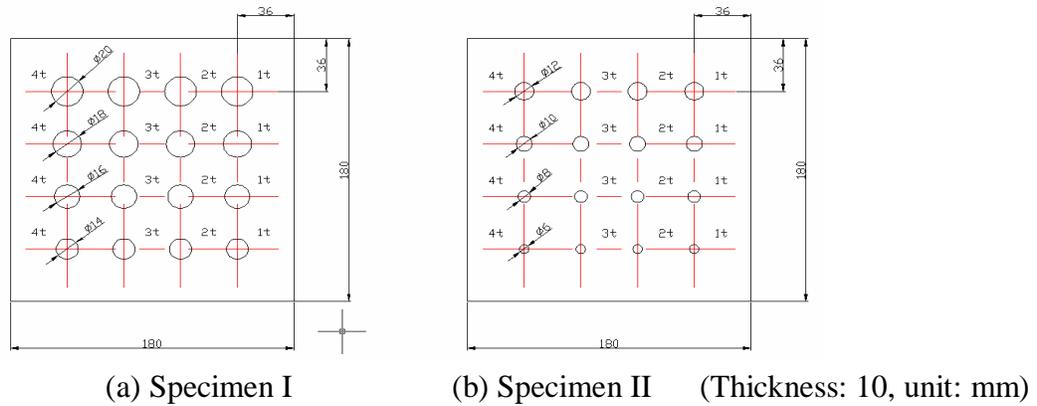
Artificial specimens with back-drilled-bottom plate defects
